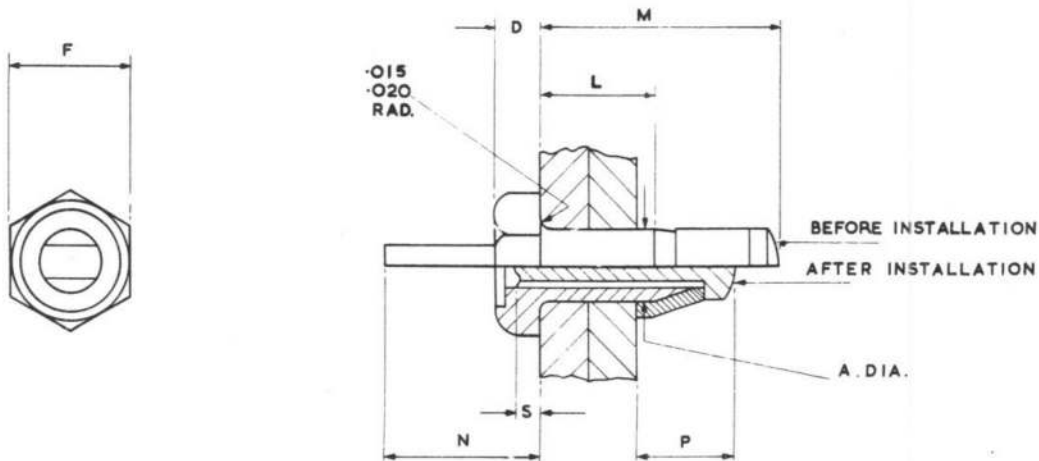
Hexagon-headed Jo-bolt, general dimensions
